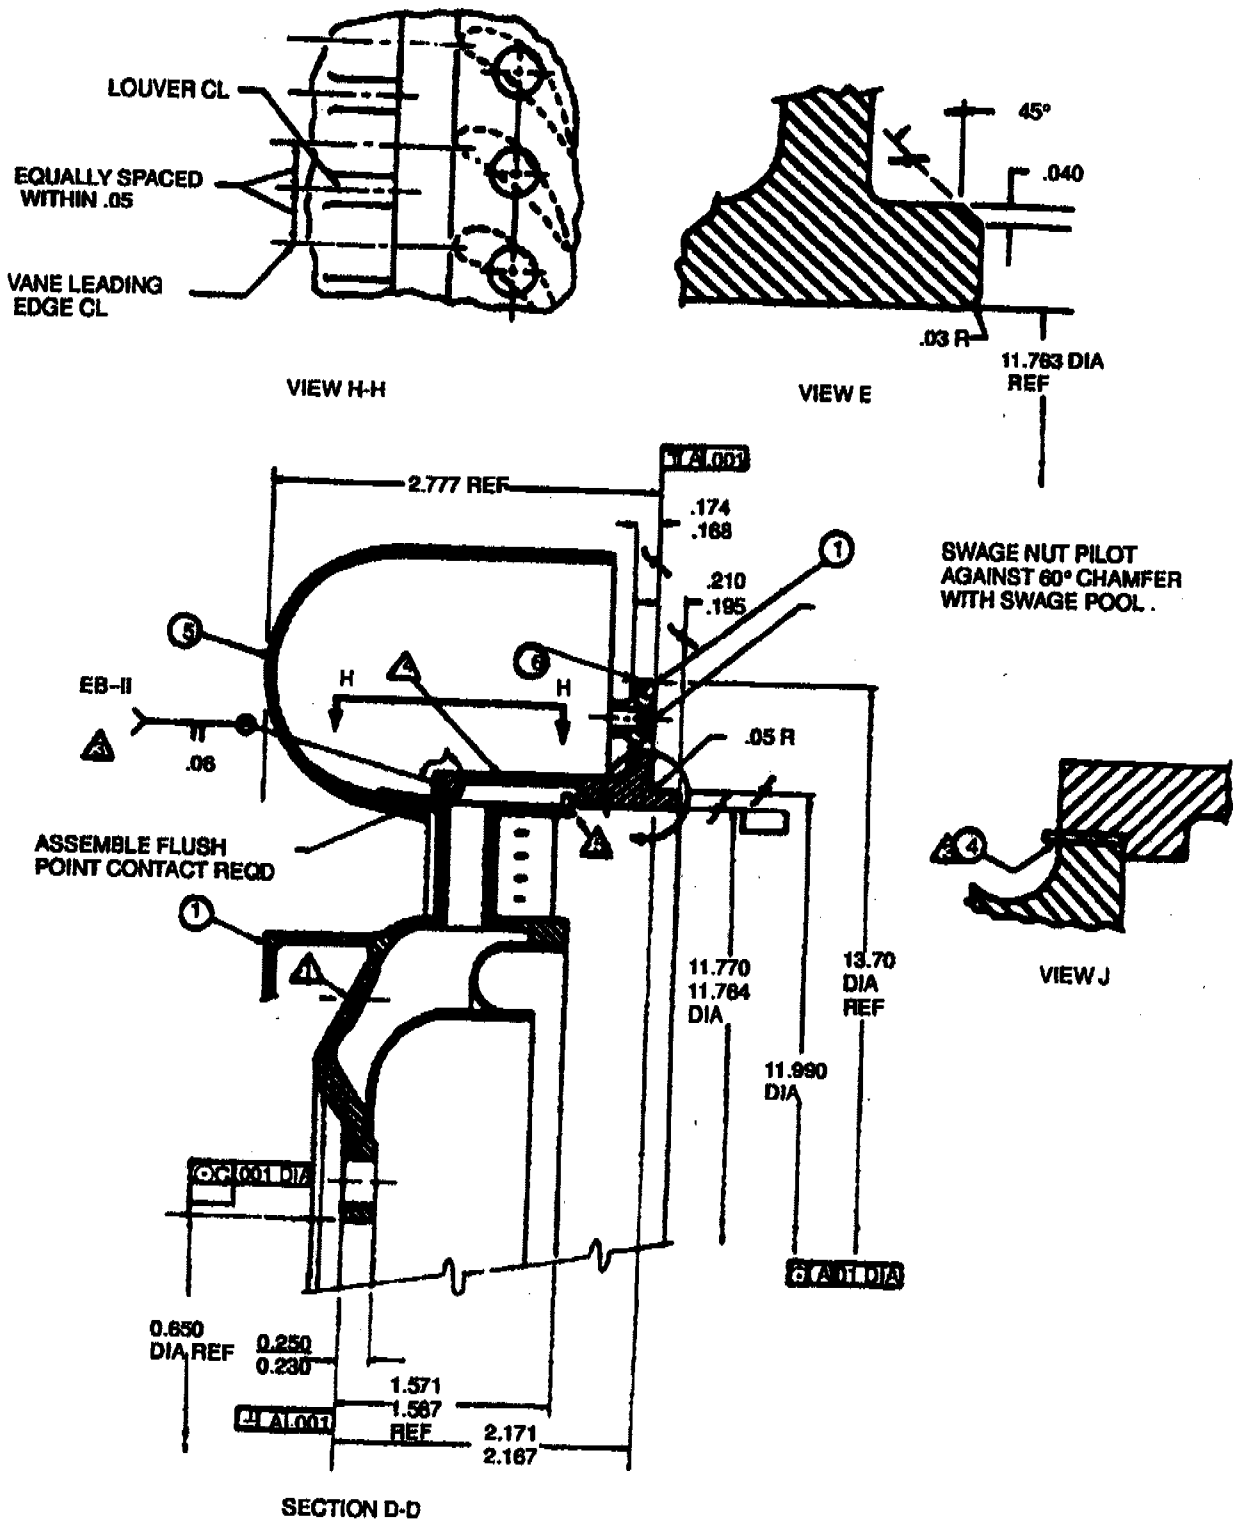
Welding and Finish Machining of Nozzle Assembly.
